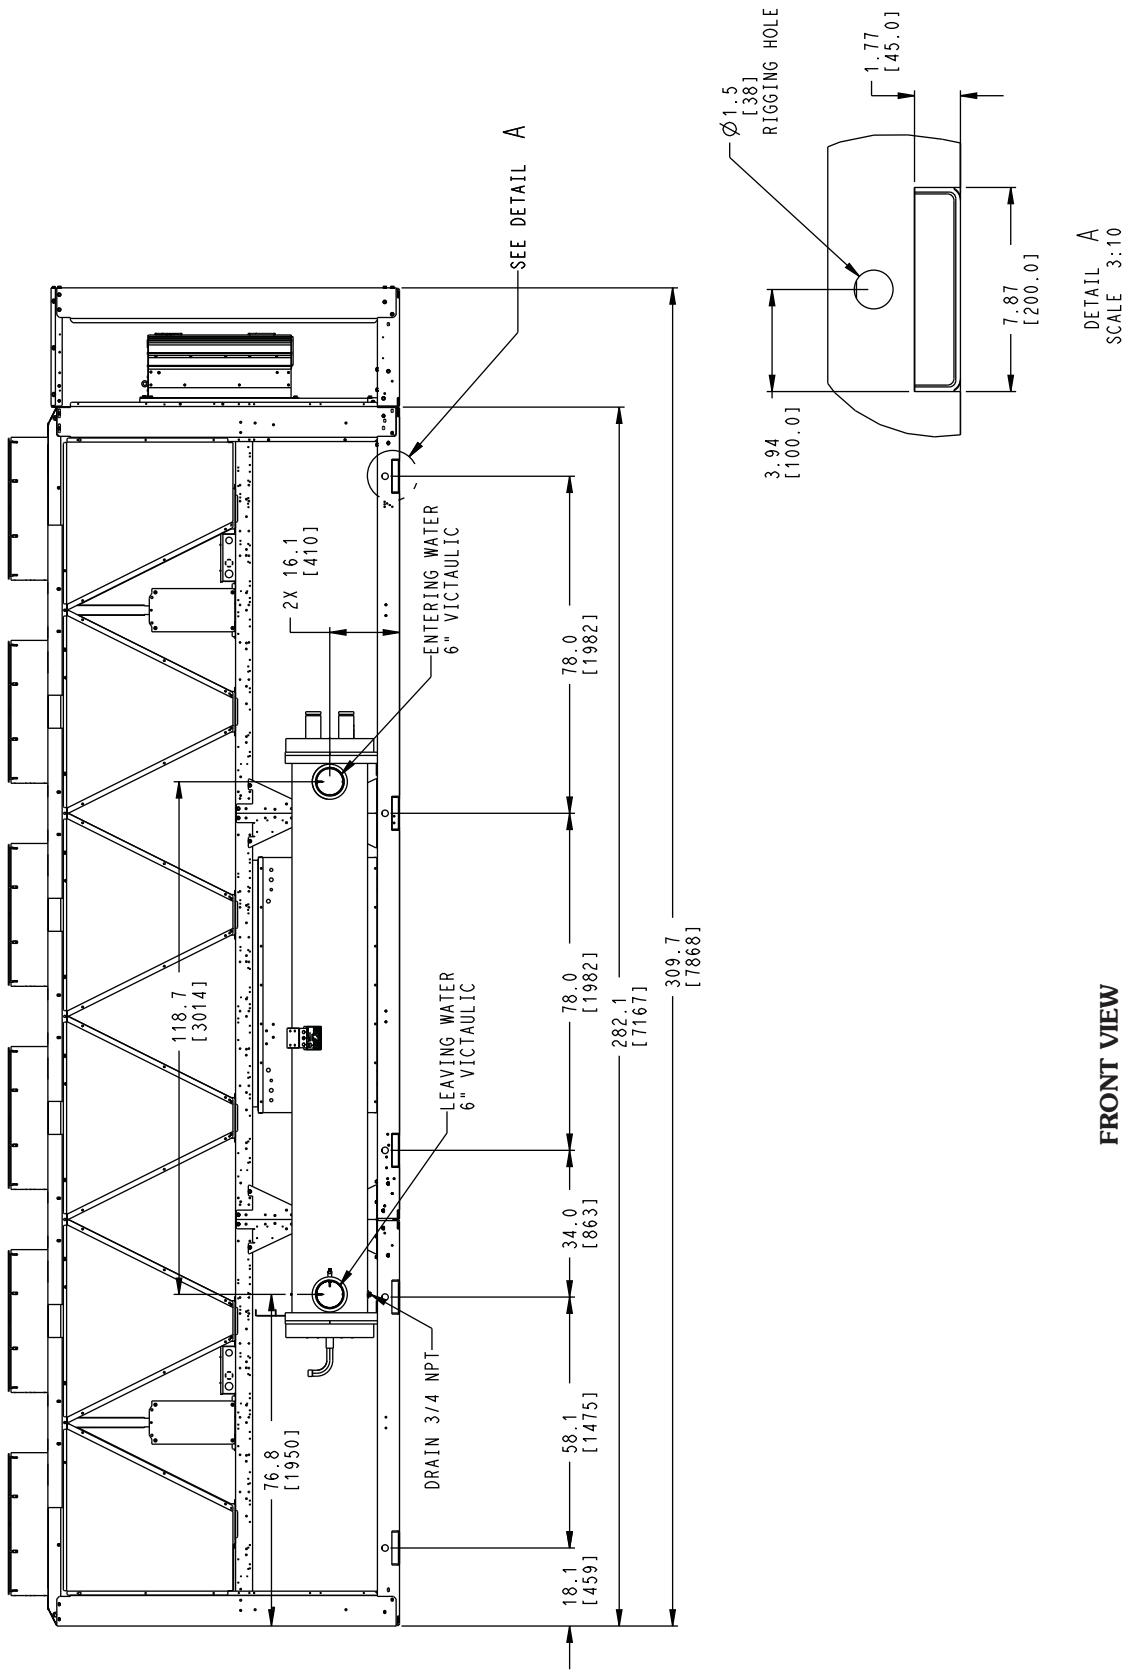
30XA182,202 Air-Cooled Liquid Chiller Dimensions (DX Chiller) (cont)
